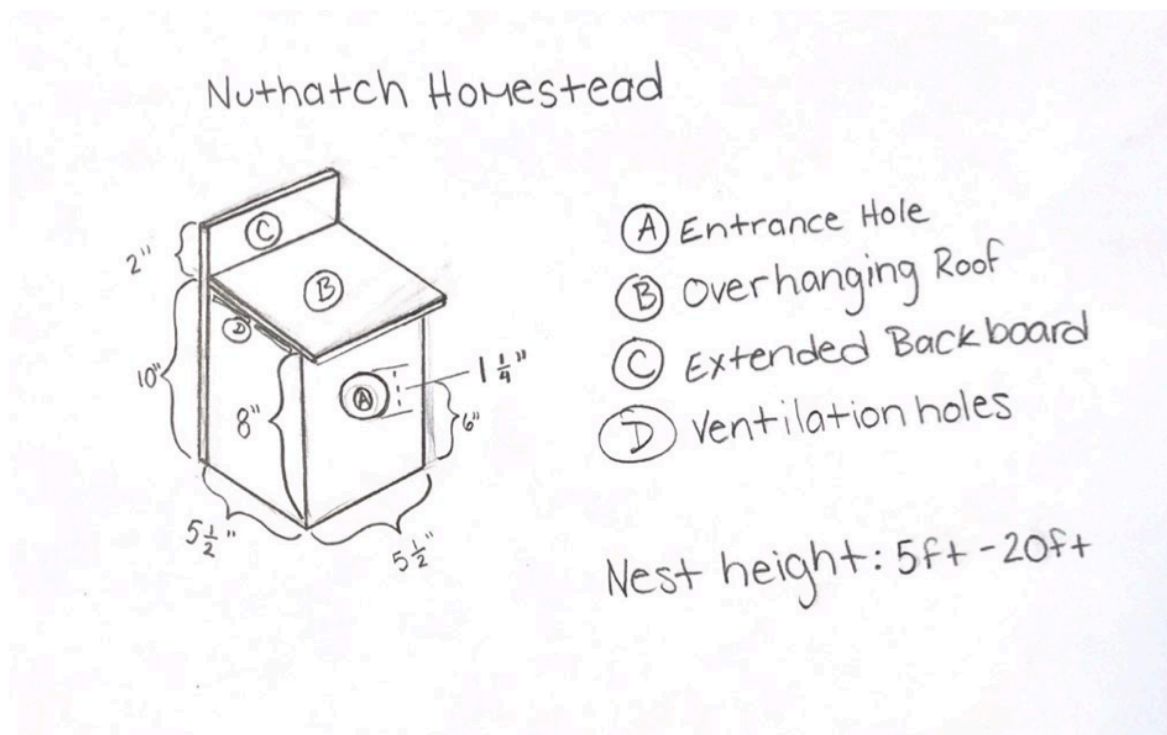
Dimension-Board Construction drawing of Nuthatch Homestead with dimensions and labels by Rize Martins de Oliveira
